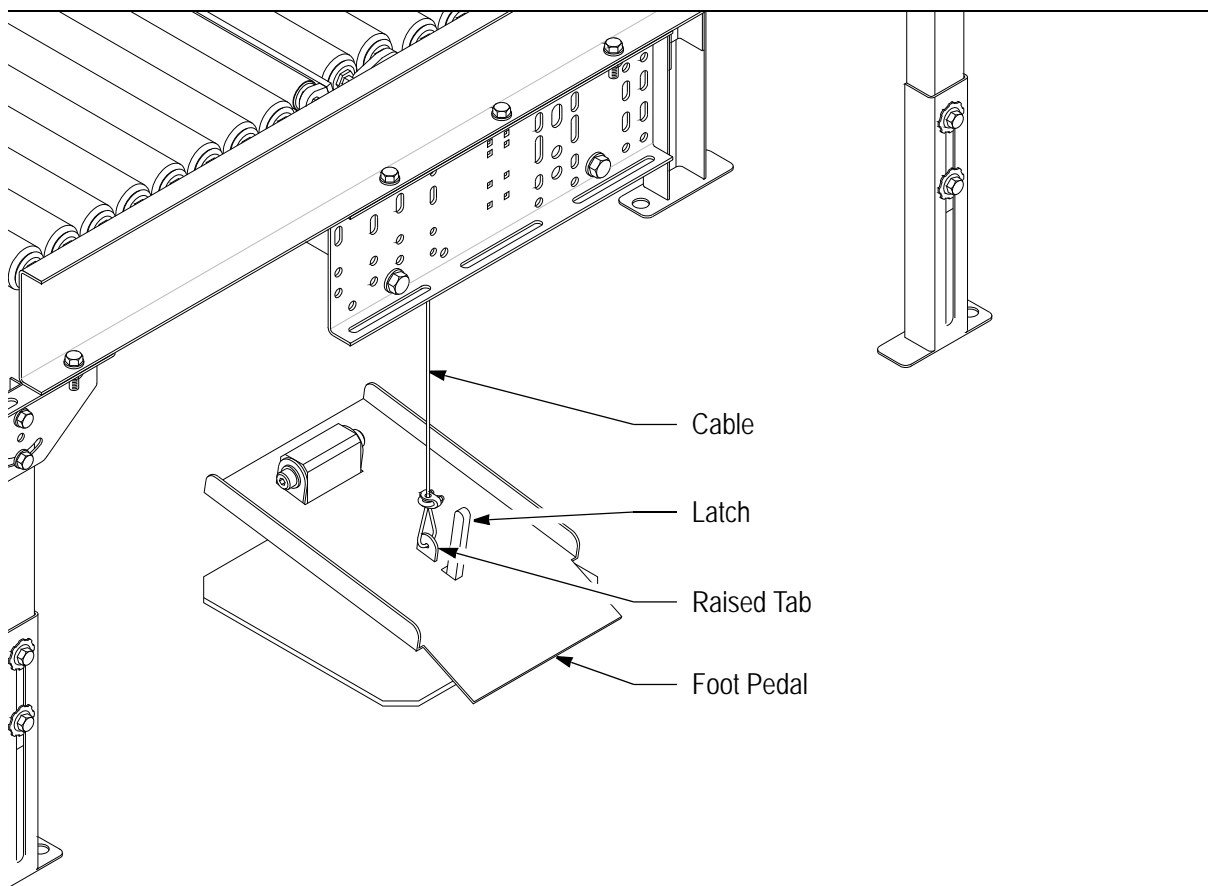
“Direct Drop” Foot Pedal Installation
